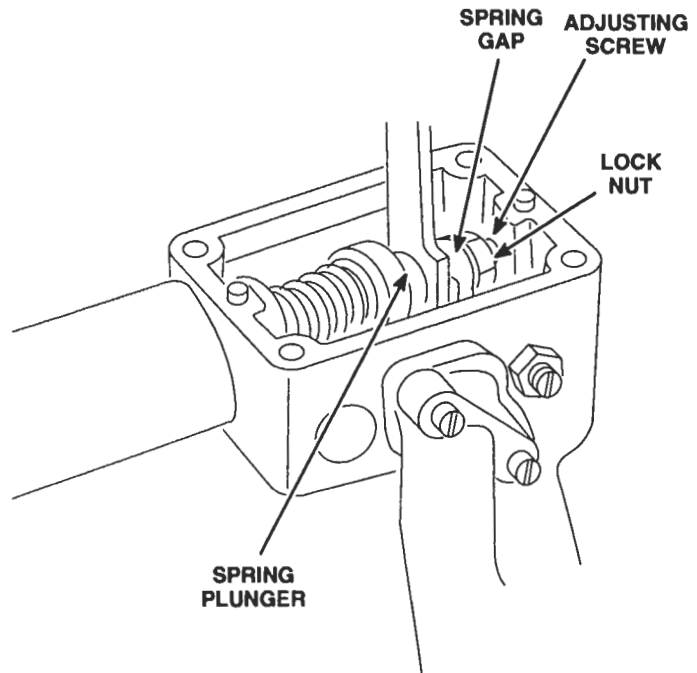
Adjusting Gap (Single-Weight Governor) Using Tool J 5407
